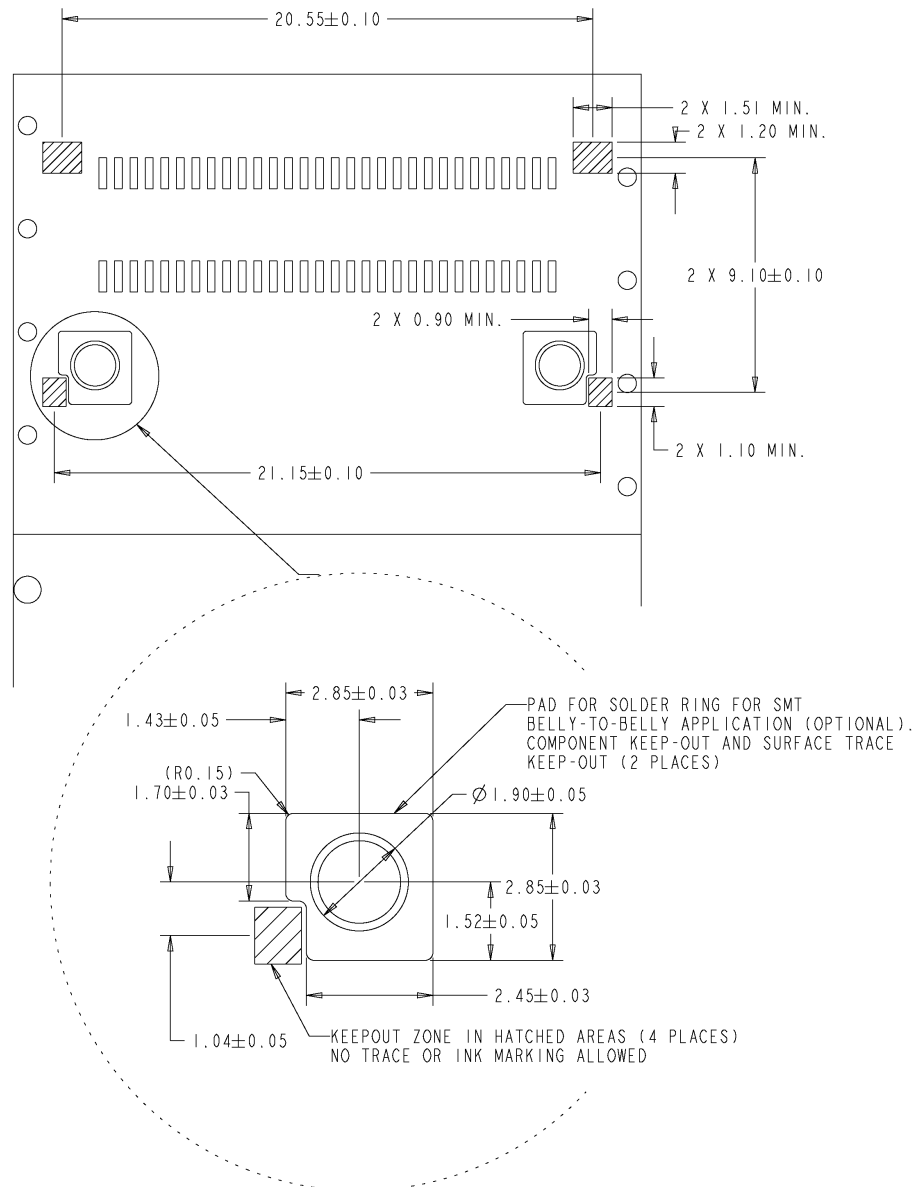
Pad for solder ring (for belly-to-belly application)
